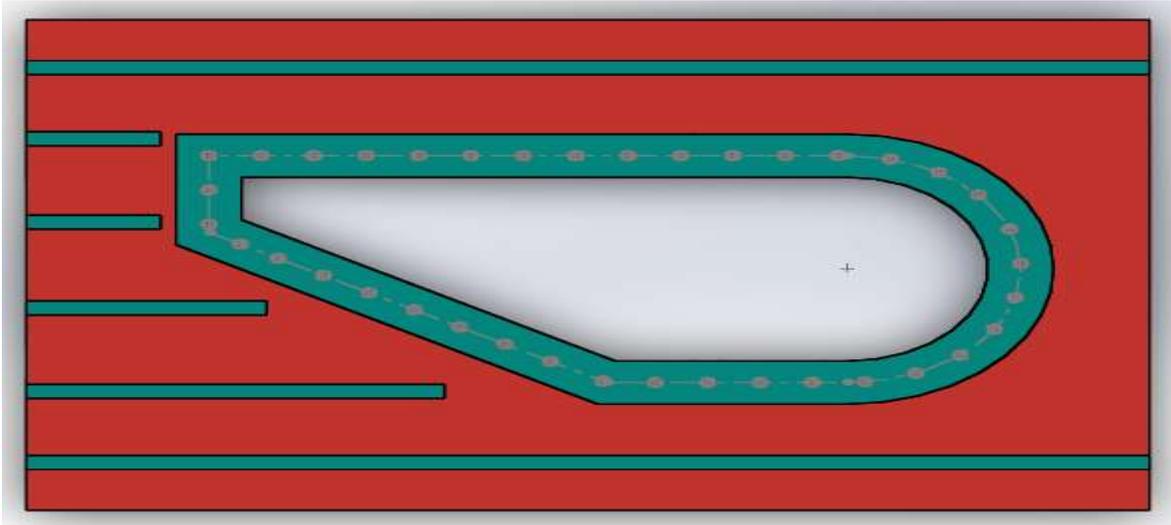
CAD model of stiffened panel with landing gear opening cut out
